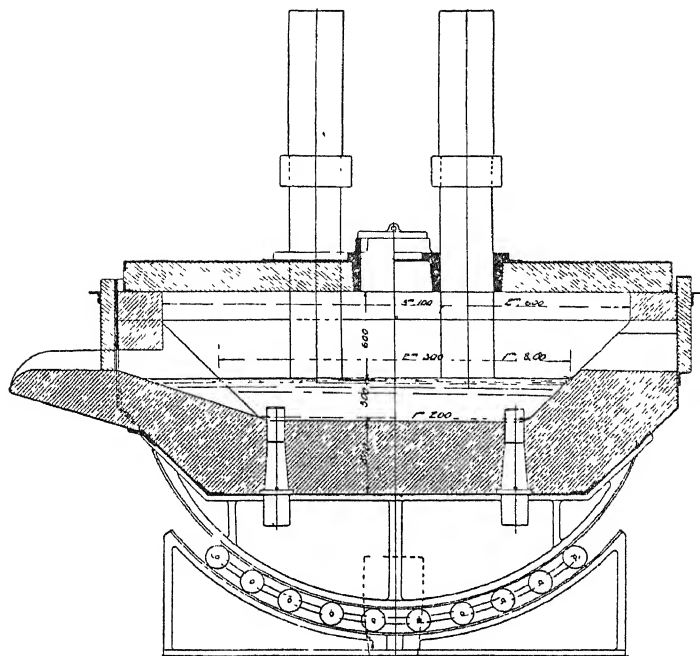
SECTION OF 12-TON GIROD ELECTRIC FURNACE.
